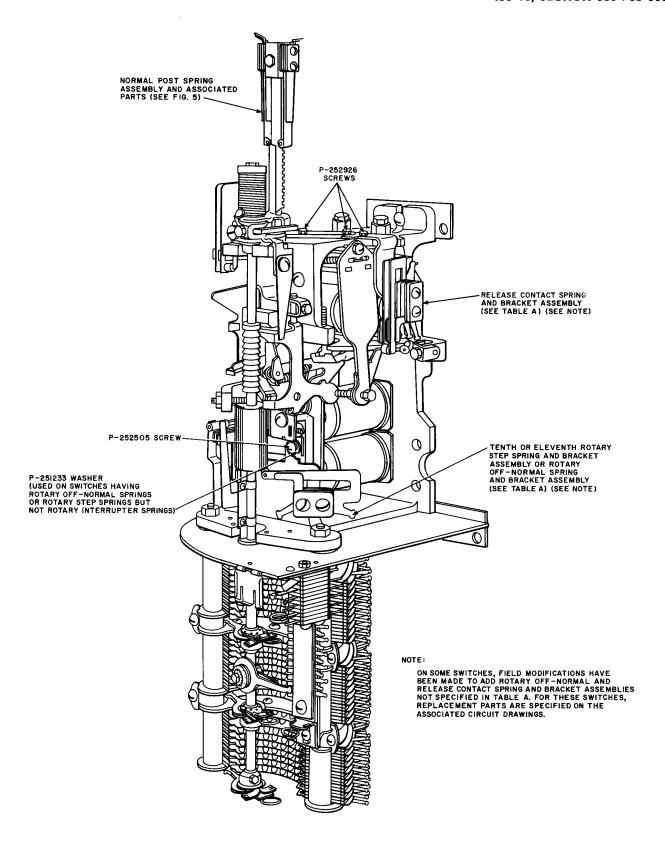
Contact Spring Assemblies, Test Jack Assemblies, and Associated Parts of 197-Type Switch as Viewed From the Right Side
